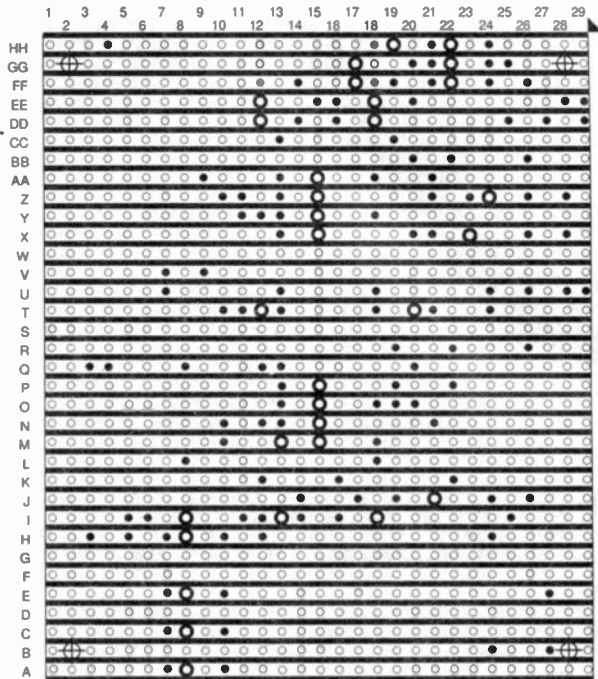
Vibration Alarm stripboard component layout and details of breaks required in the underside copper tracks.
